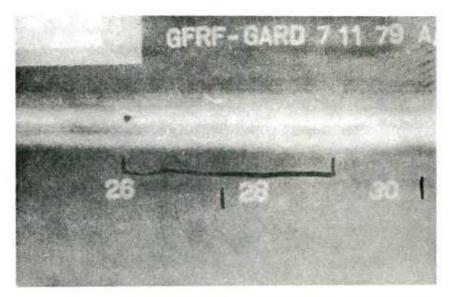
RADIOGRAPHY - INCOMPLETE PENETRATION FULL PENETRATION WELD A/PT-12
